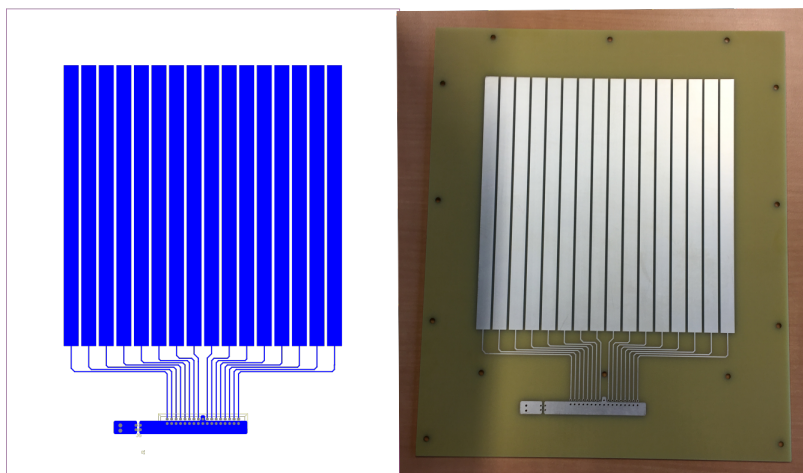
Printed circuit board made by Daniel Michotte. Left : Drawing. Right : Physical PCB
